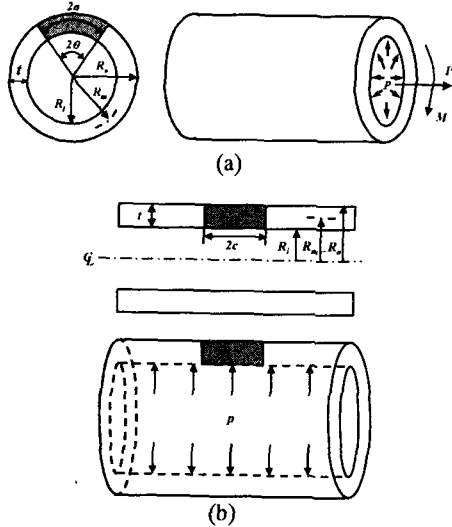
Schematic illustrations for a pipe with (a) a circumferential through-wall crack and (b) an axial through-wall crack
